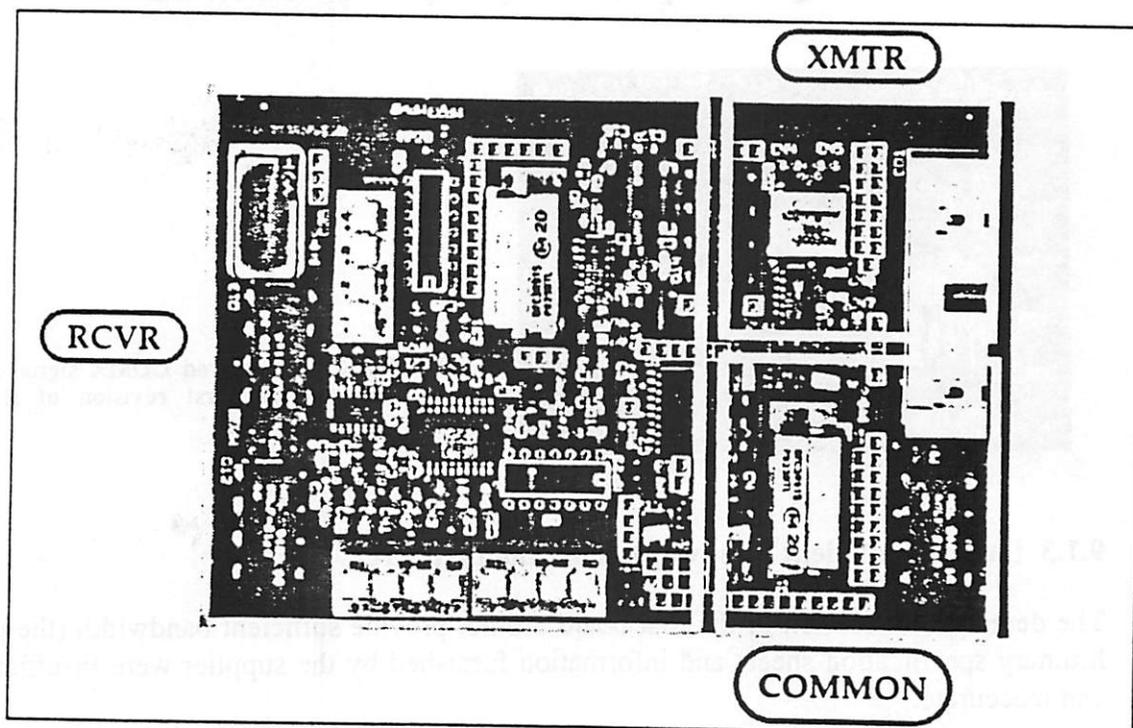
The first revision of this board, implemented on a four layer PCB. The board dimension, excluding the test structure, is 13.4cm X 7.6cm.
